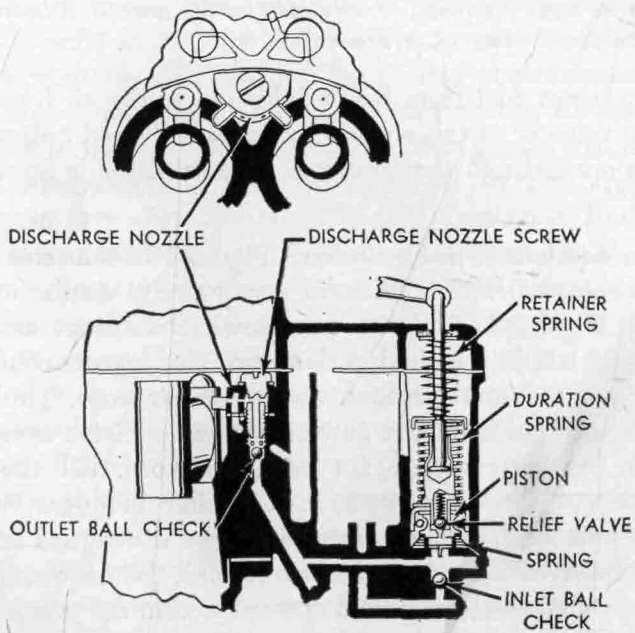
Accelerator-pump system and location of discharge nozzles in a dual carburetor. (Studebaker-Packard Corporation)
